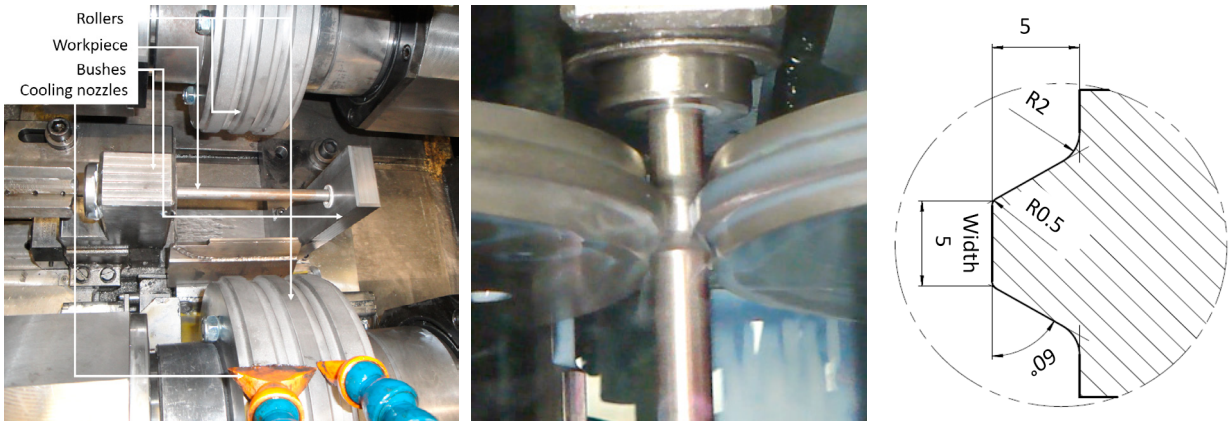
Cross rolling experiments: Left: Test setup, Middle: Rolling process of notch, Right: Drawing of roller (5mm width).
